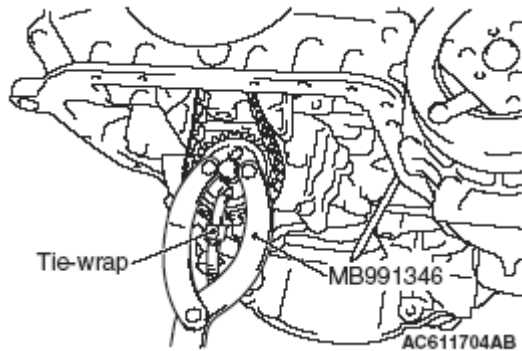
Holding Oil Pump Sprocket With Special Tool MB991346
